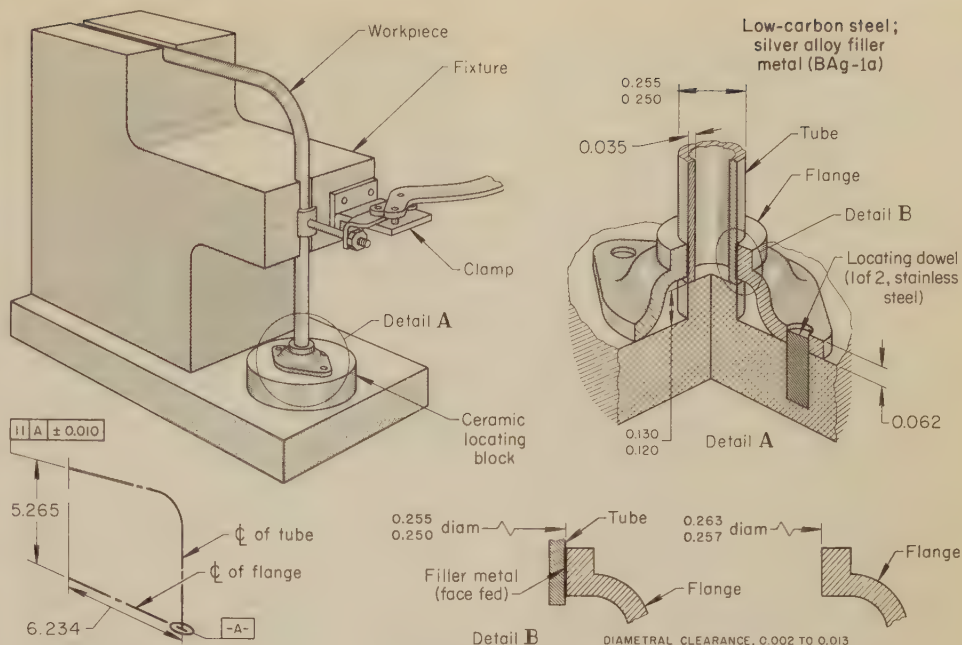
Tube-and-flange assembly, showing fixture used for manual torch brazing (Example 576)
